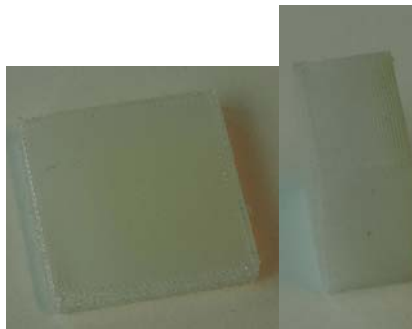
(a) Top view of first layers of printed cube PLA; (b) side view of printed cube PLA .
